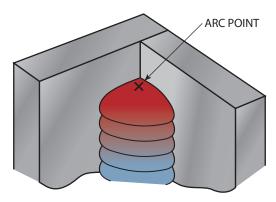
Moving the arc as close as possible to the leading edge of the weld will provide good root fusion.
